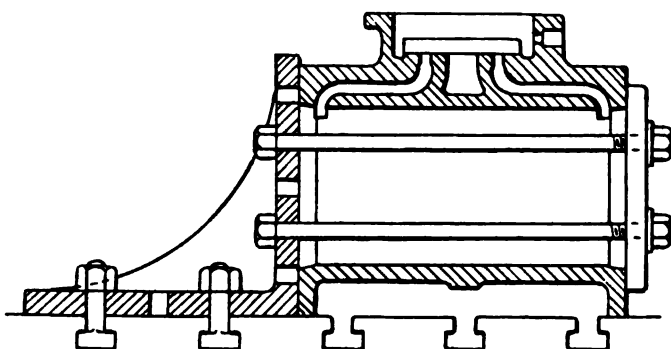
Angle Plate holding Cylinder for Planing, Shaping, or Milling.
